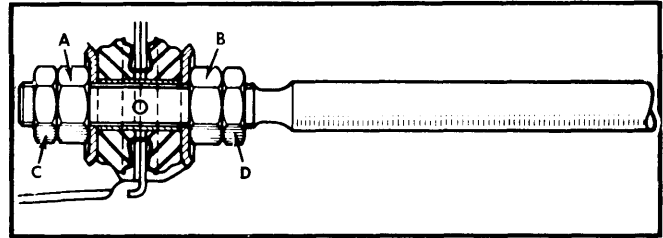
Caster Adjustment Points at Tie Rod Mounting (All Models Except R-5)
